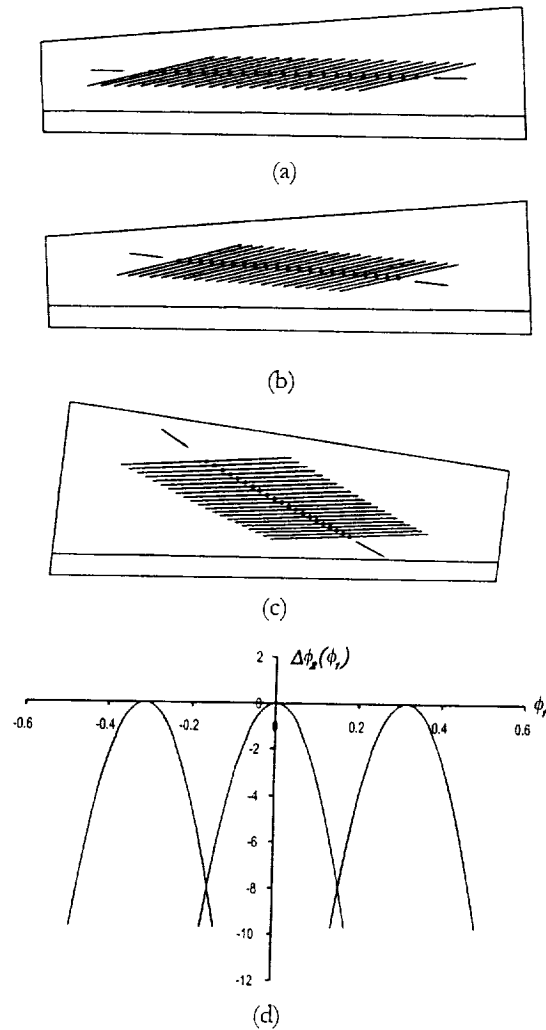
Bearing contact on gear tooth surfaces and predesigned function of transmission errors for: (a) longitudinally oriented bearing contact for gear drive of example 1; (b) adjusted bearing contact for gear drive of example 2; (c) adjusted bearing contact for gear drive of example 3; (d) function of transmission errors for examples 1, 2, and 3.
